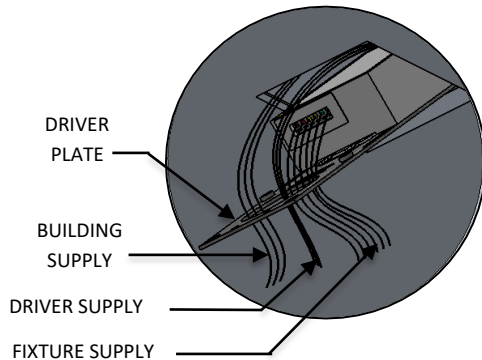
DETAIL SHOWING BUILDING SUPPLY AND DRIVER WIRE
